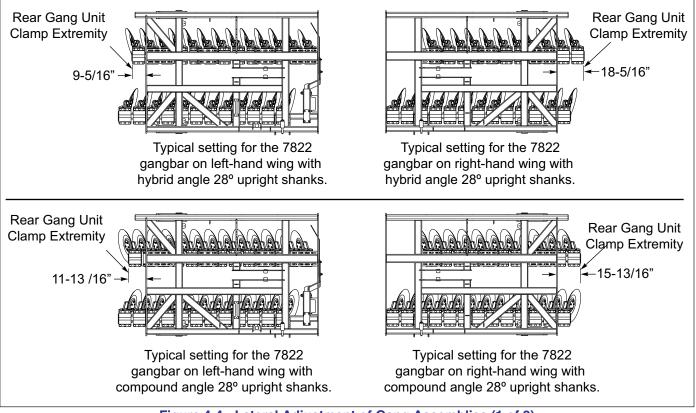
Lateral Adjustment of Gang Assemblies (1 of 2)
